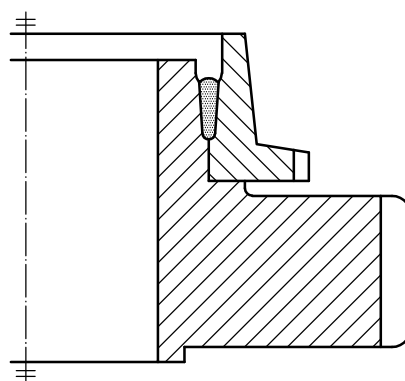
Example of an axial weld with a depth of fusion zone adapted to suit the strength requirement (not welded through the full thickness of the joint)
